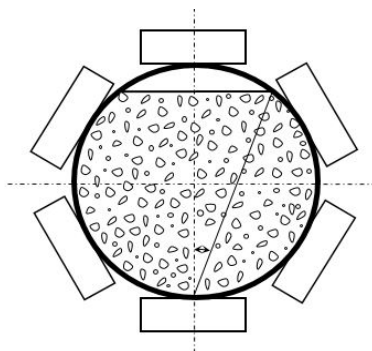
Normal cross-section of a tubular conveyor with six-roller roller supports
